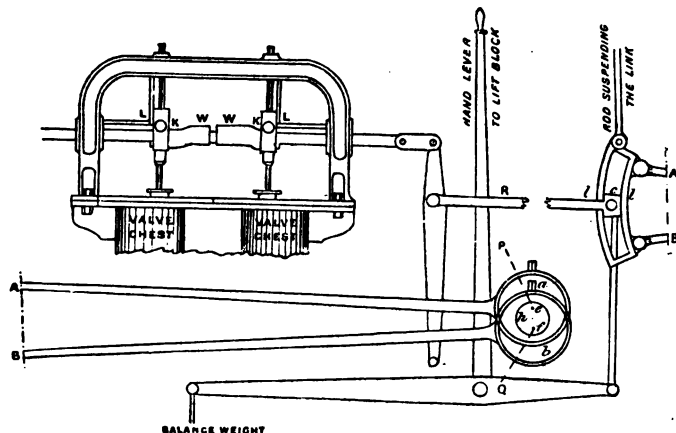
Eccentrics, eccentric-rods, link, valve-rods, hand-lever, valve-chests, valve-spindles, etc. This figure only shows two valves out of the four required for each cylinder.
